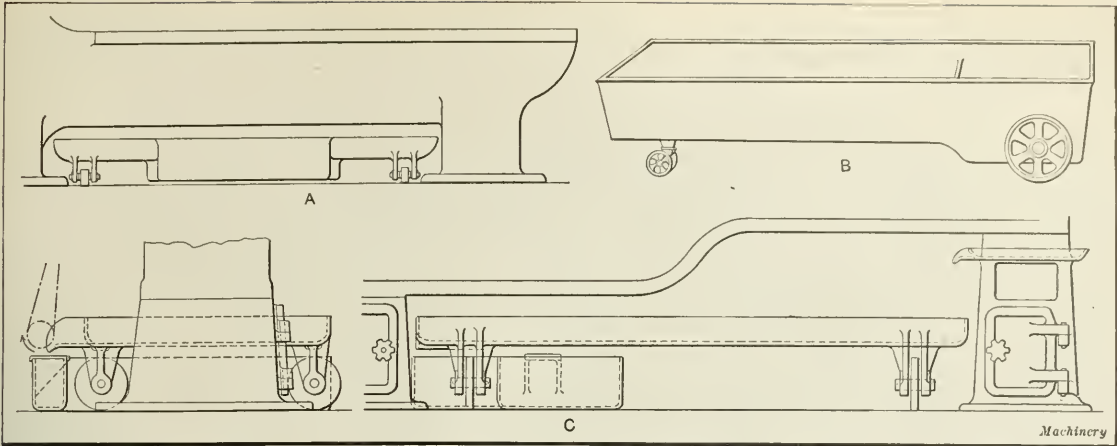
Portable Oil Pans which can be used to Advantage under Automatic Screw Machines, etc., making Removal of Chips an Easy Matter
